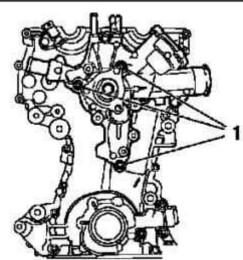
Install the coolant pump: 1 - bolts fastening
